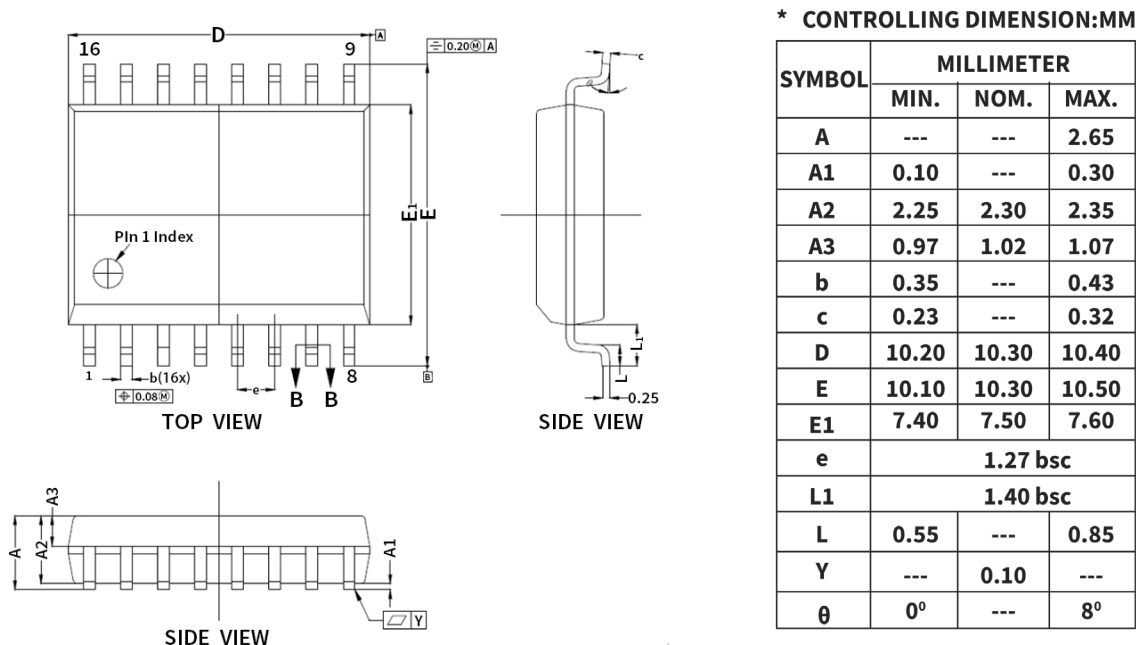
SOP16(300mil)/SOW16 Package Shape and Dimension in millimeters
